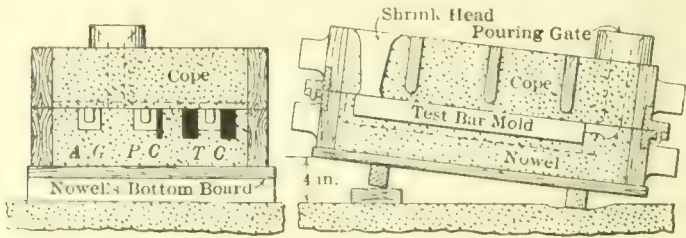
SECTIONAL VIEWS OF MOULD FOR MAKING THE SQUARE TEST BARS
